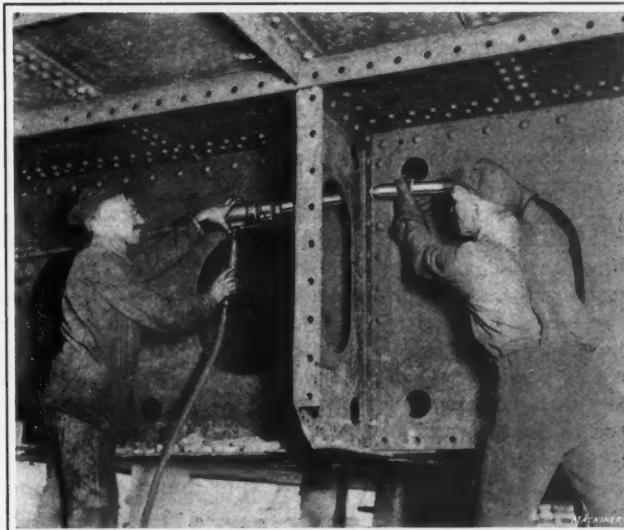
Self-supporting Hammer holding-on while driving 7/8-inch Rivets
